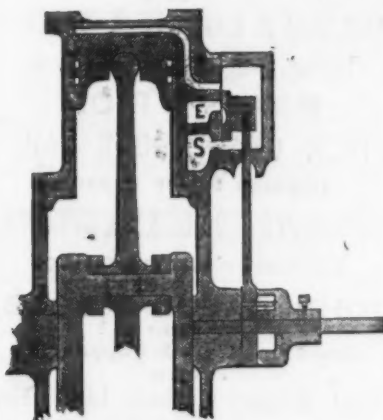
Longitudinal Section, Showing Connection of Piston to Crank-Pin and Shaft, Eccentric and Valve Motion.
